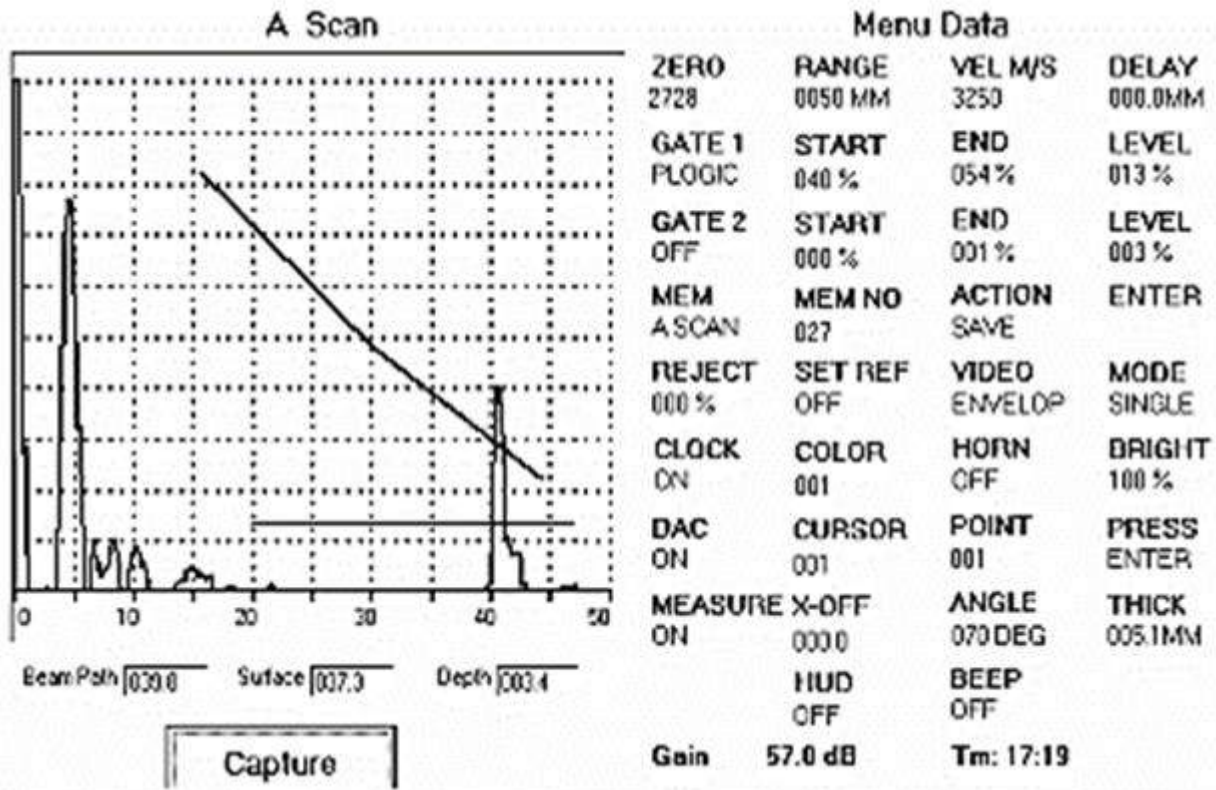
At a distance of 41mm from the edge of the work piece, there is a lack of penetration in TIG welding.
